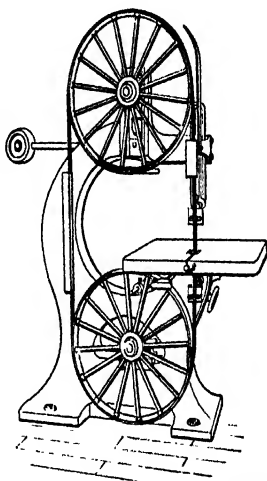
Improved Pattern Endless Band-saw Machine.
